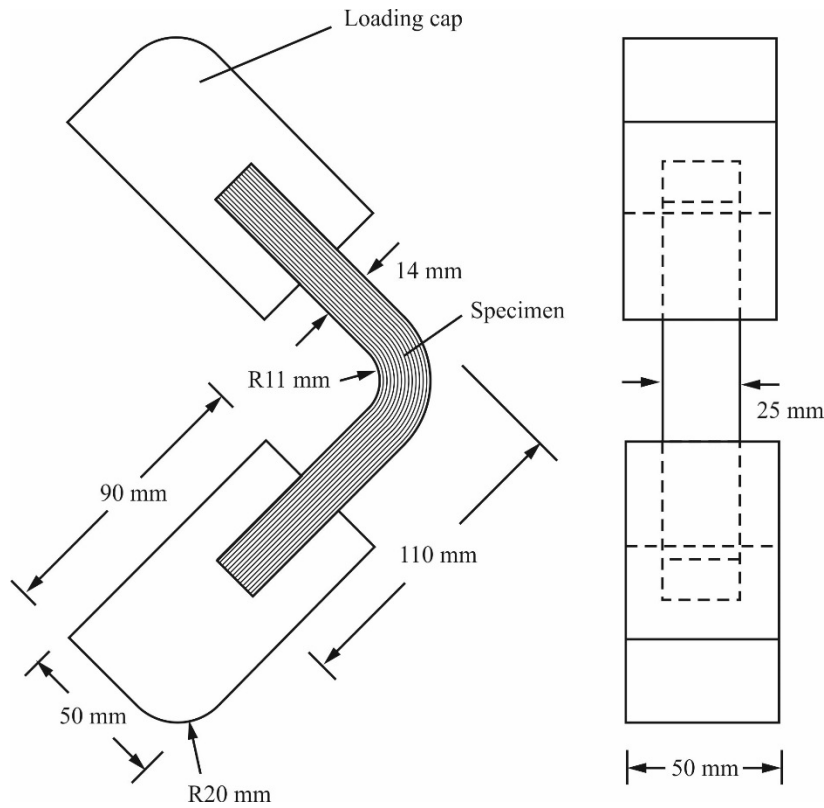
Dimensions of the composite angle specimen used to measure through-thickness assembly stress.
